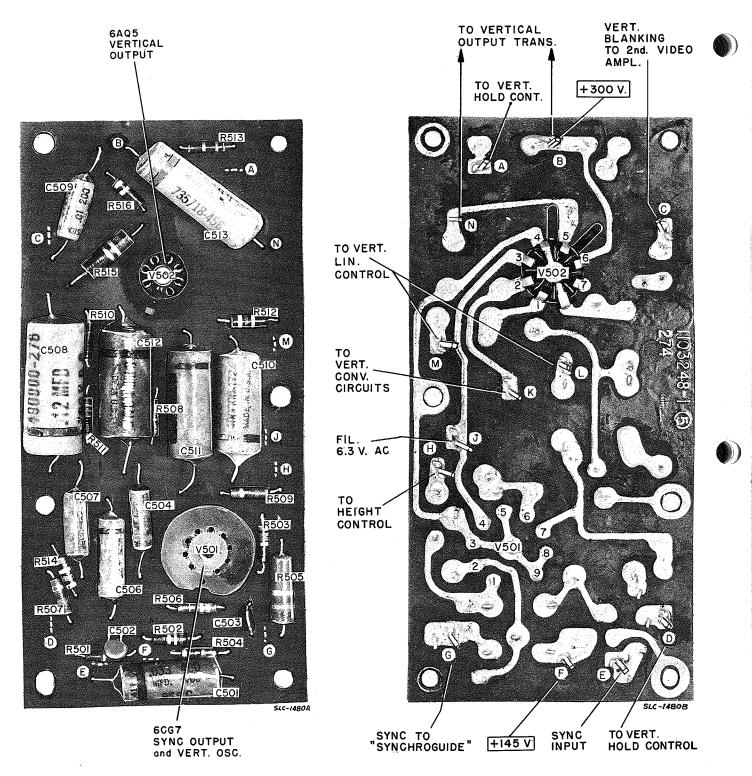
Top and Bottom Views, Printed Circuit Board PW-500—CTC5—Showing Component Locations and Voltage Measuring Points—Sync Output, Vertical Oscillator, Vertical Output.
